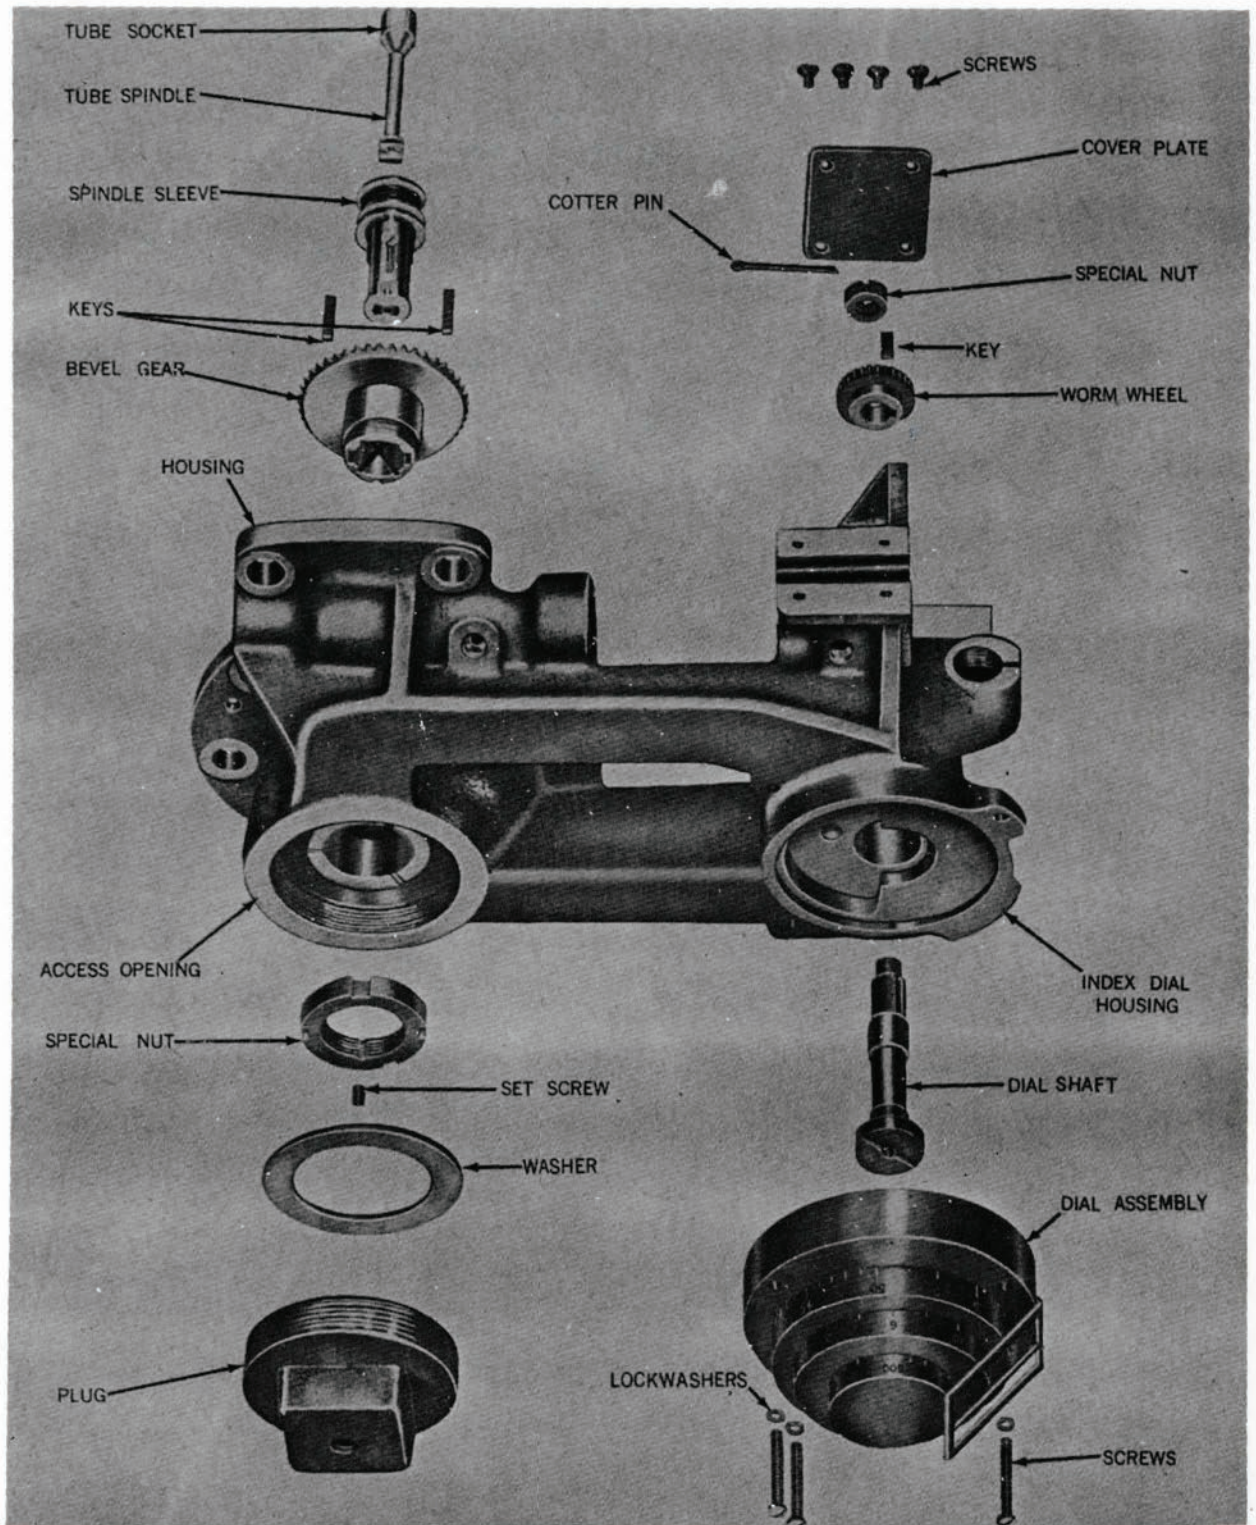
Circle and Depth Setting Mechanism, Vertical Assembly Parts.
